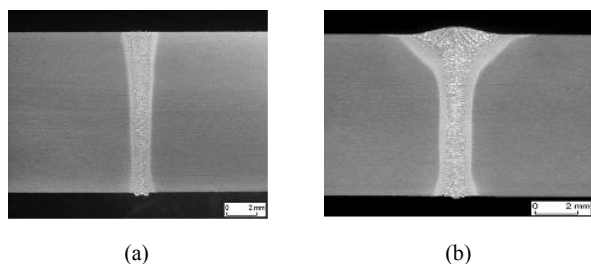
Macrosections of welding connections made with laser welding (a) and hybrid laser-arc (b)
